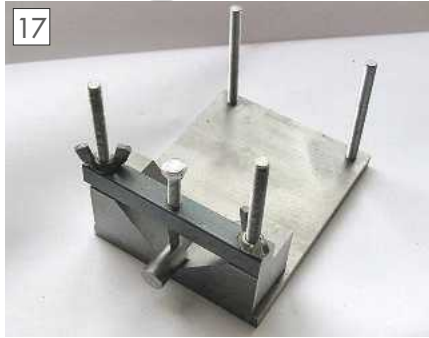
shows a substantial piece of 50mm steel bar and photo 17 shows a short piece of 10mm bar mounted in the clamp. Photograph 18 shows how small pieces of flat material can be mounted for cutting and photo 19 shows the clamp mounted in the vice and cutting in progress.
